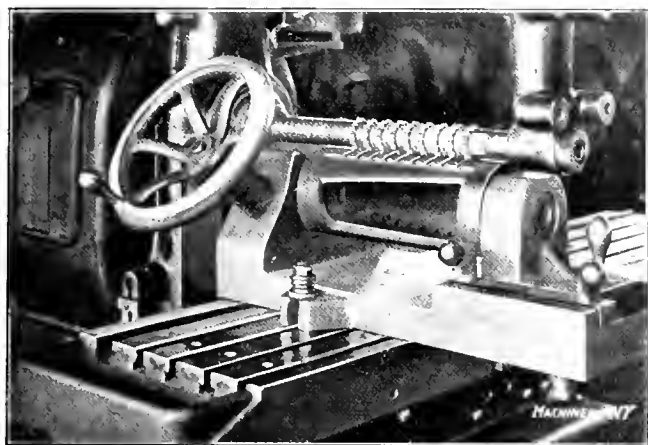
Milling Nine Grooves simultaneously in a Quick-change Gear Cover
